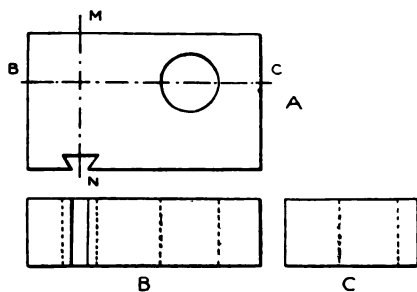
TOP PLAN, SIDE ELEVATION AND END ELEVATION OF BLOCK.
